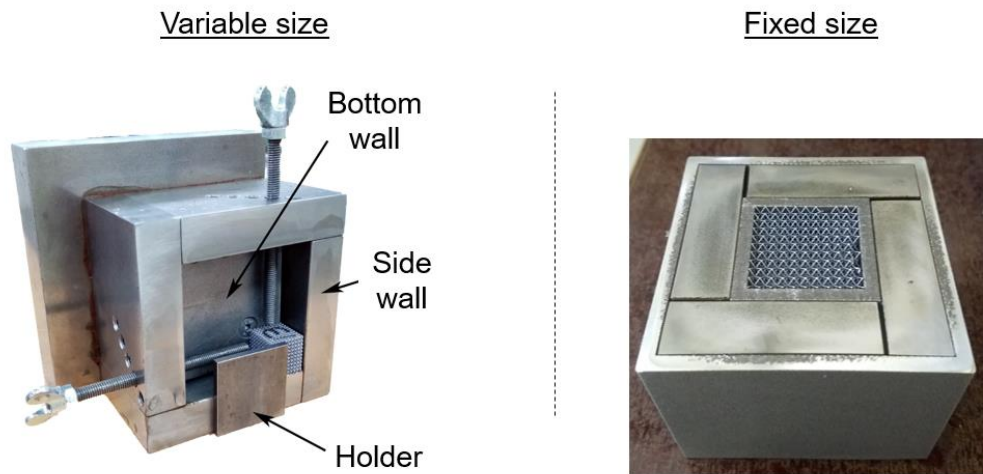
Grinding tools for lattice structures: tool of variable size (left) and tool of fixed size (right).
